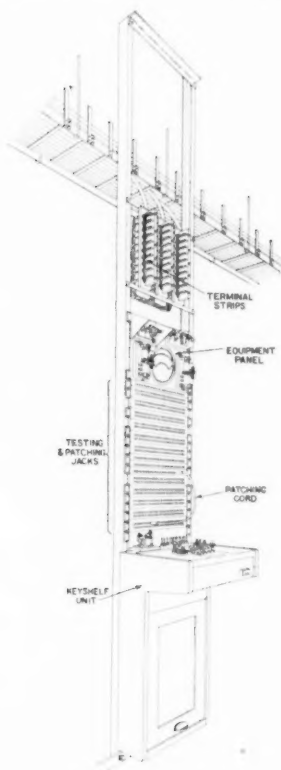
Typical General Assembly of Panel Mounted Test Board
